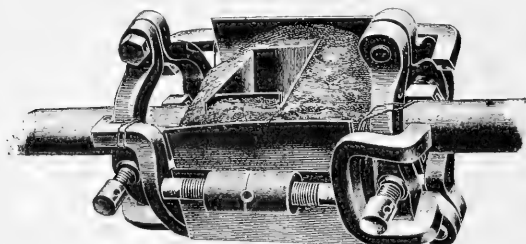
Casing packed round with moulding sand in readiness for the welding operation.
